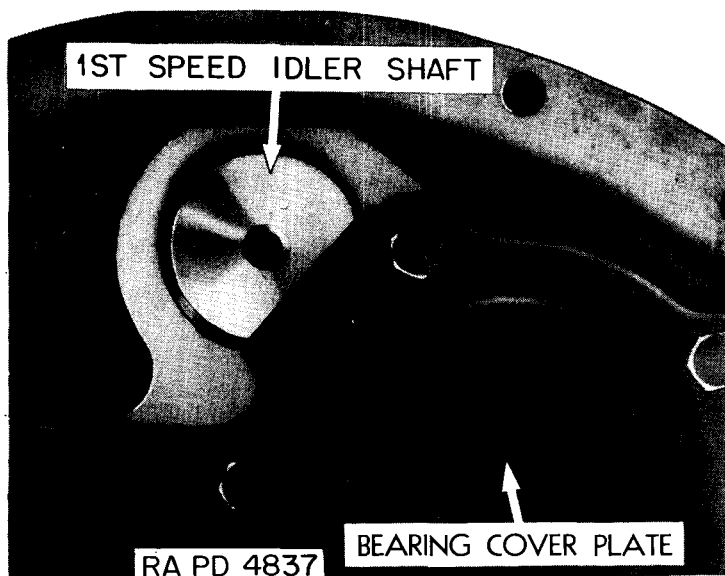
FIRST SPEED IDLER SHAFT, EXTENDING THROUGH COVER PLATE
